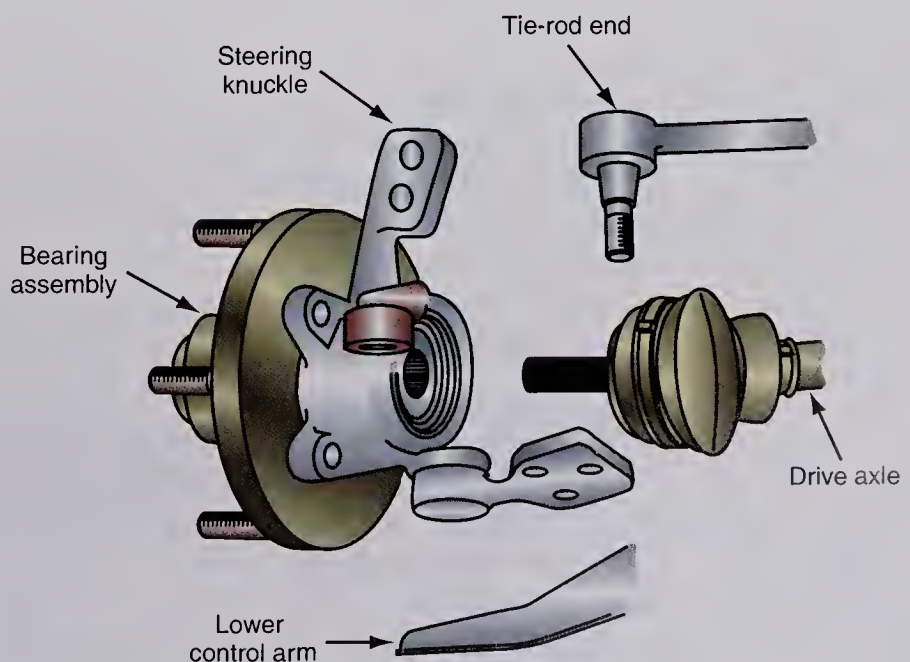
Removing the steering knuckle from the lower control arm.
